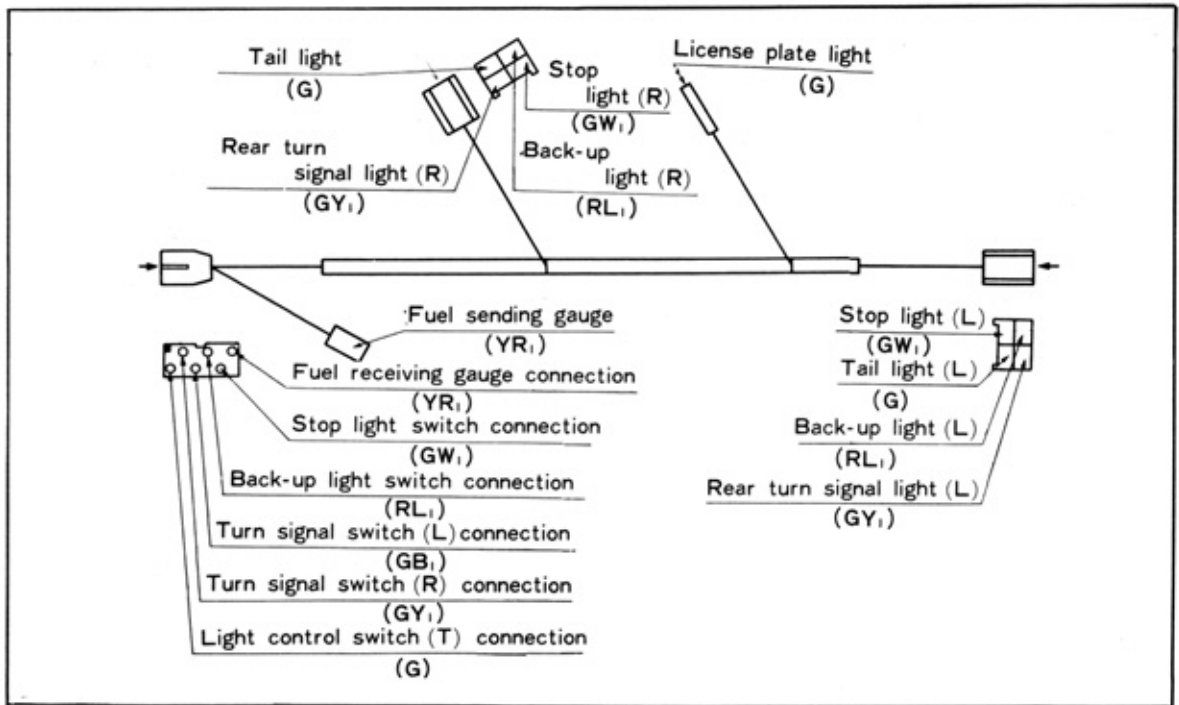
To Rear Light Wiring Harness (COROLLA 1100)
